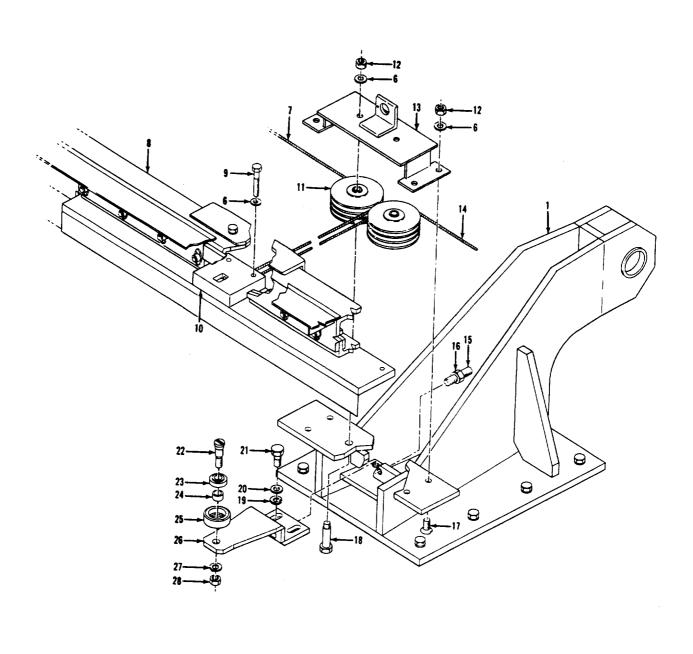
Extension Platform Assembly (Sheet 1 of 13)
